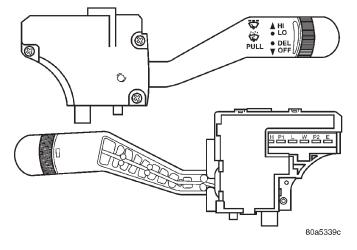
Windshield Wiper Switch and Washer Switch REAR
